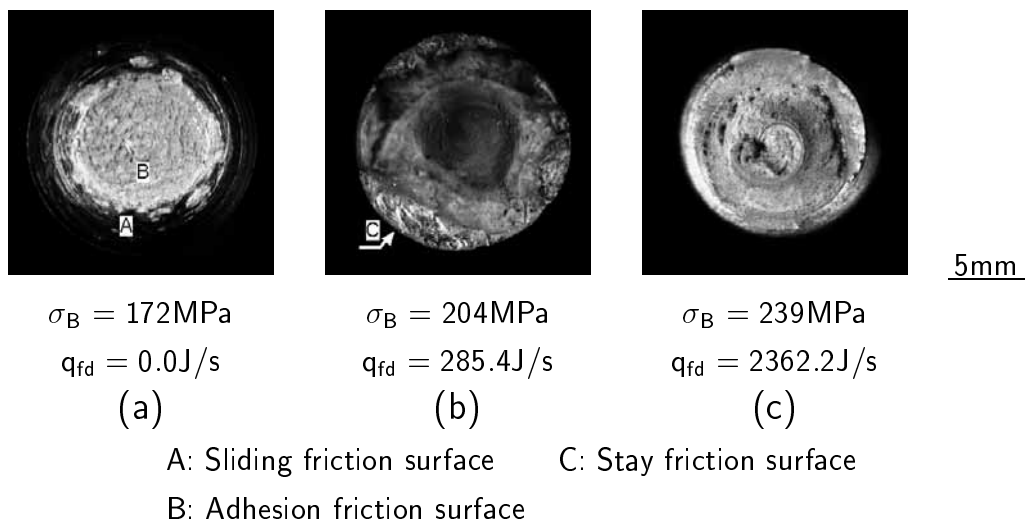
Appearance of tensile fractured surface(16mm diameter).
